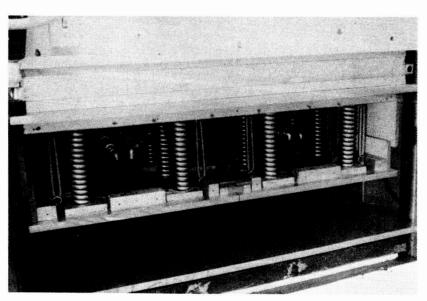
Press Assembly with Acoustic Insulation Panel Removed
